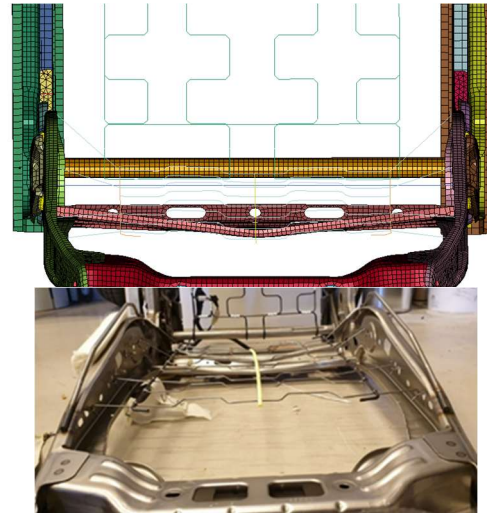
Top view, after simulation of tests 1807-1809 (Location C, Impactor 3, 5.42m/s). The light red part represents the deformed lower cross member. The photo is of Seat No. 1 after finalised tests.
